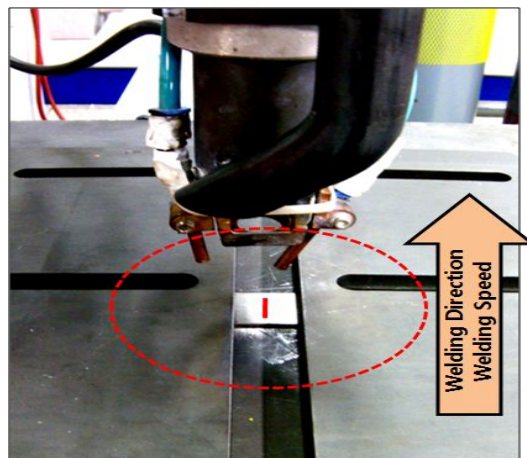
Experimental setup for Nd:YAG Laser Stitch Welding process
